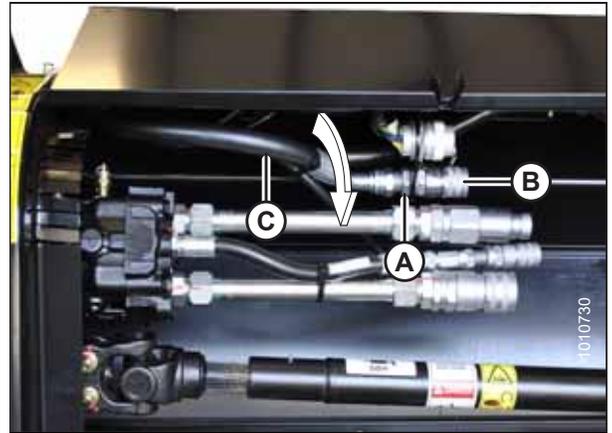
Auger and Reel Pressure Coupler and Hose – 5.5 m (18 ft.) Header Shown
